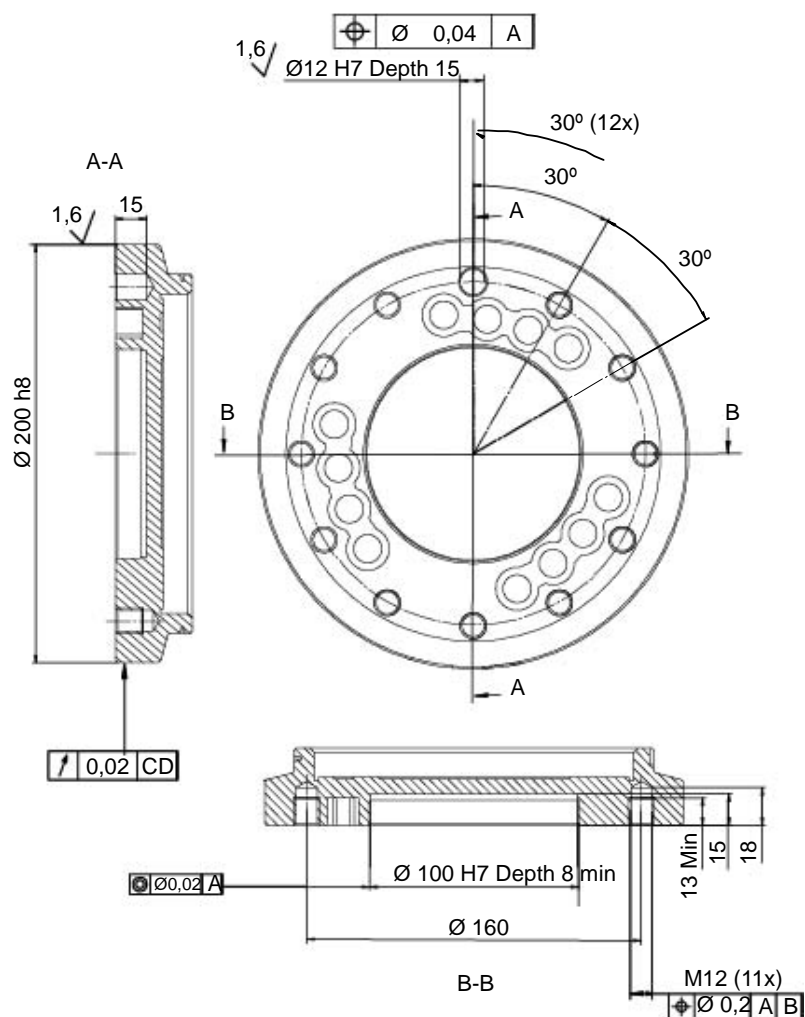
Robot tool flange ISO/DIS 9409-1:2002 (dimensions in mm).
